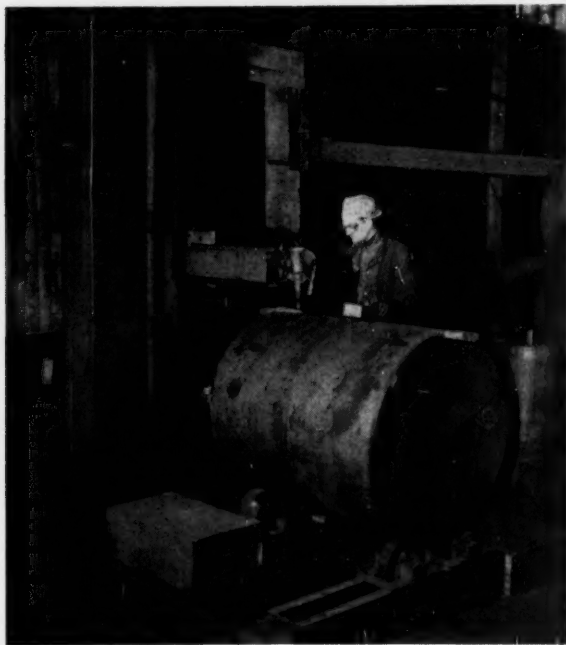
Using the same machine as in Fig. 4 to make the weld on the outside of the longitudinal seam of the shell as the boom is fed forward while the weldment remains fixed.
